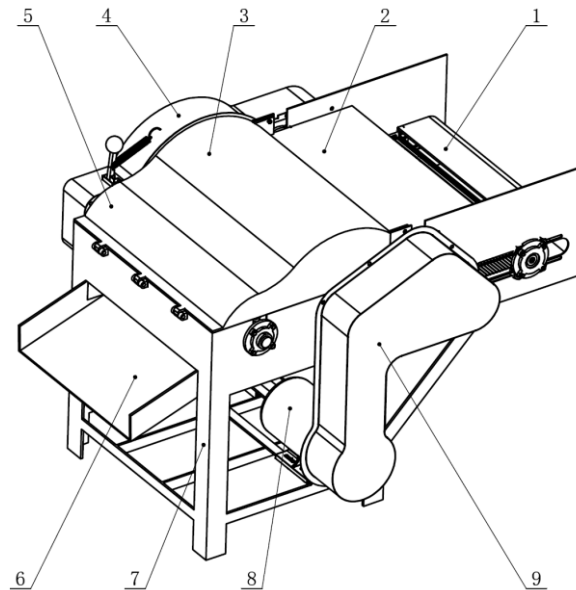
Structural sketch of the whole machine. 1: Transmission mechanism; 2: Feed flattening mechanism; 3: Cutting mechanism; 4: Crushing and rubbing transmission system; 5: Breaking and rubbing mechanism; 6: Outlet; 7: Body frame; 8: Motor; 9: Conveying feed cutting drive system
